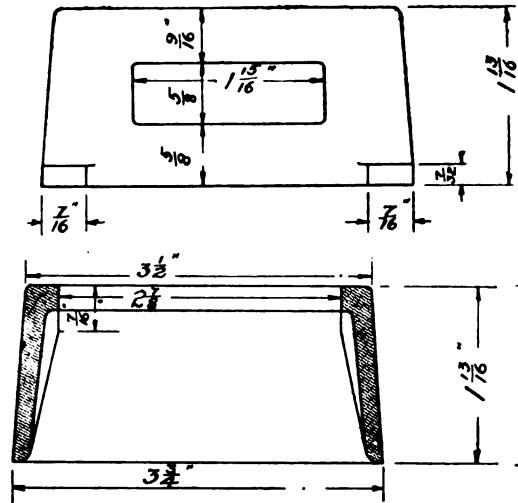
END VIEW AND CROSS-SECTION OF BEDPLATE.
